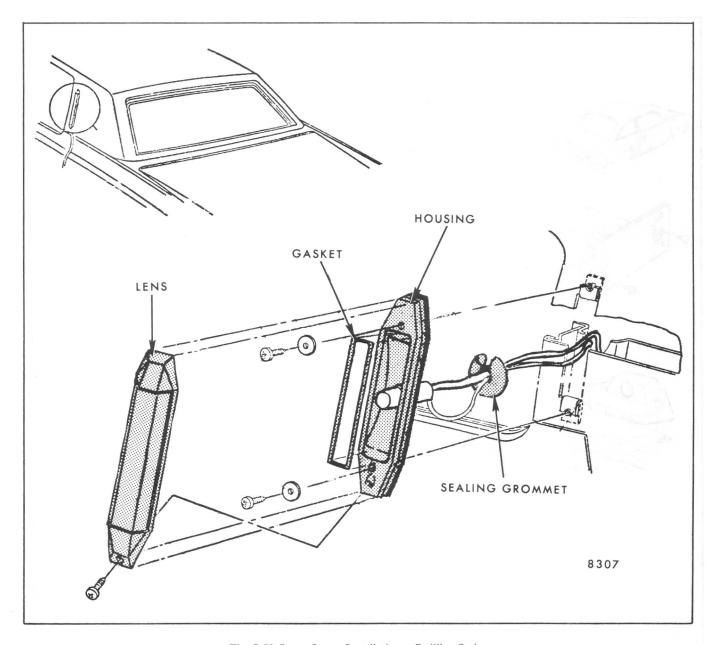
Opera Lamp Installation - Cadillac Styles
